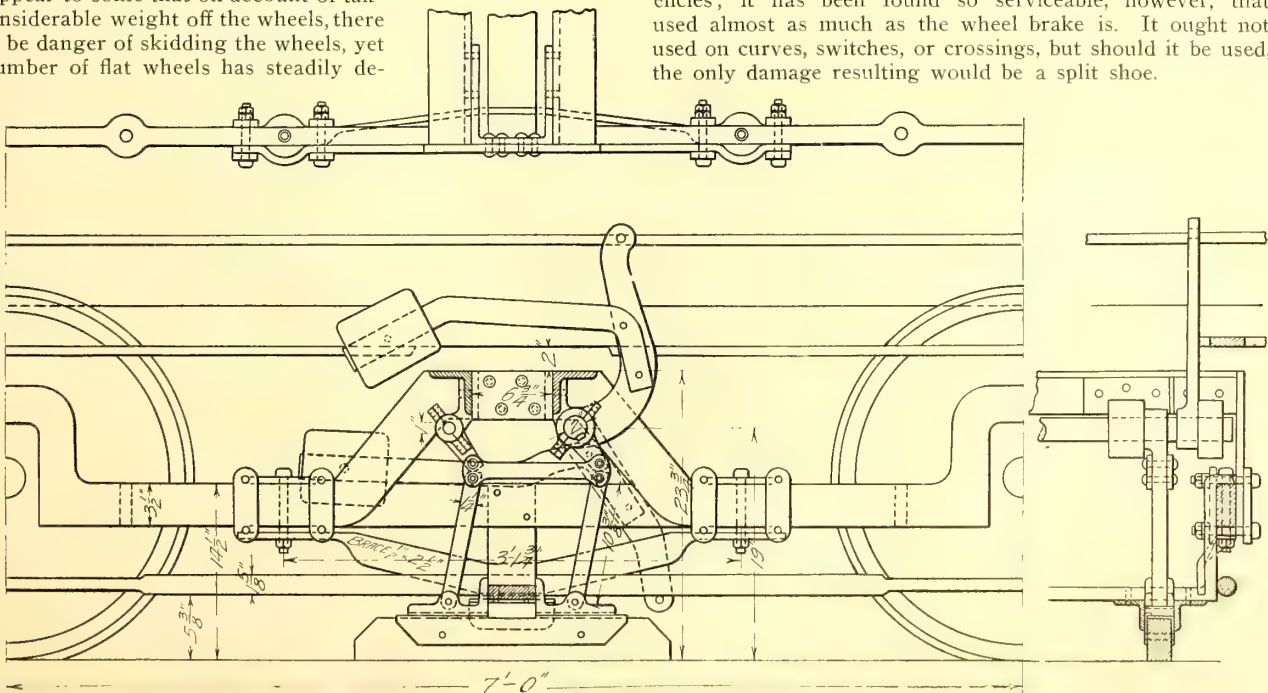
TRACK BRAKE APPLIED TO BRILL SINGLE TRUCK
